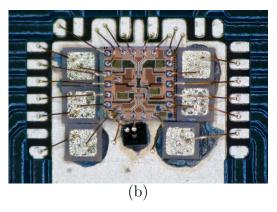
Example optoelectronic assemblies, zoomed to show wirebonding detail.
